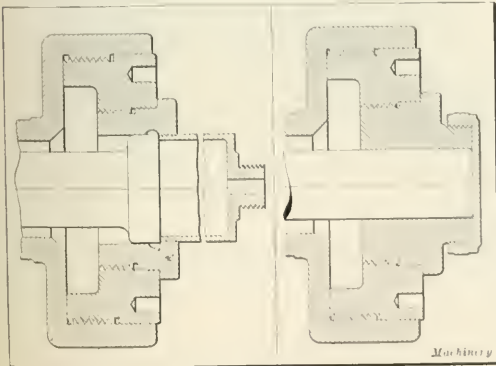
Adapter Ring and Push-out Rod Fig. 40. Internally Threaded Work locked by Push-out Rod
